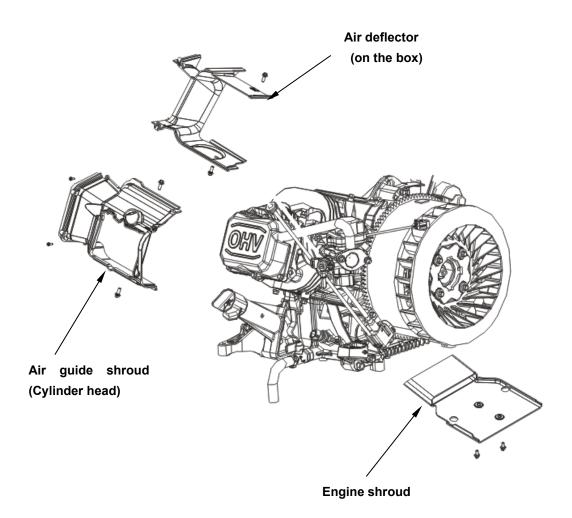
AIR DEFLECTOR, ENGINE DEFLECTOR
